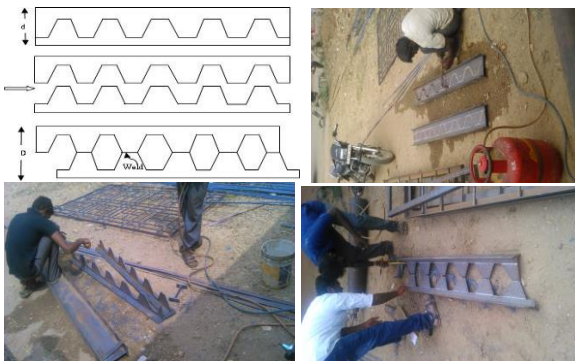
shows the flame cutting, two half pieces, arrangement of zigzag pattern.
